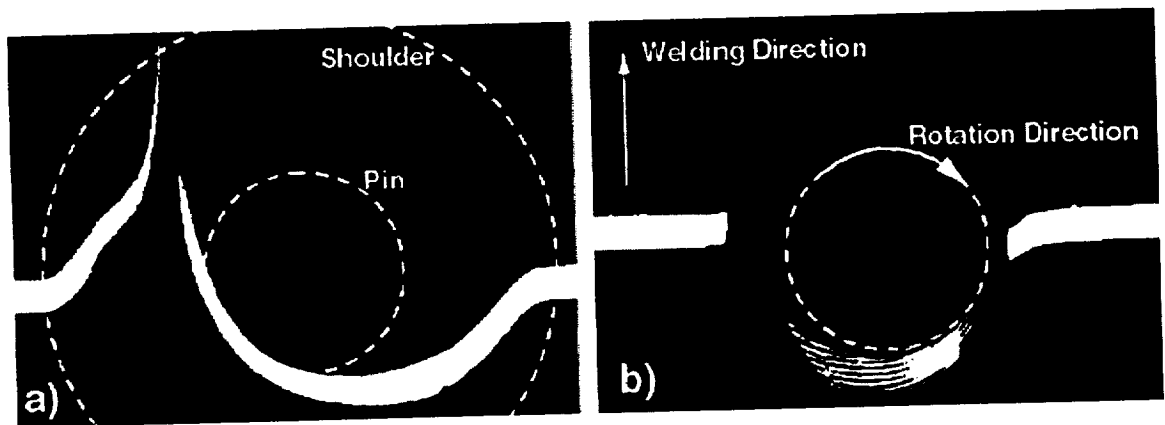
Combined markers of Weld 75 (WP=0.355 mm/rev) at the top (a) and the middle (b) of the weld.
